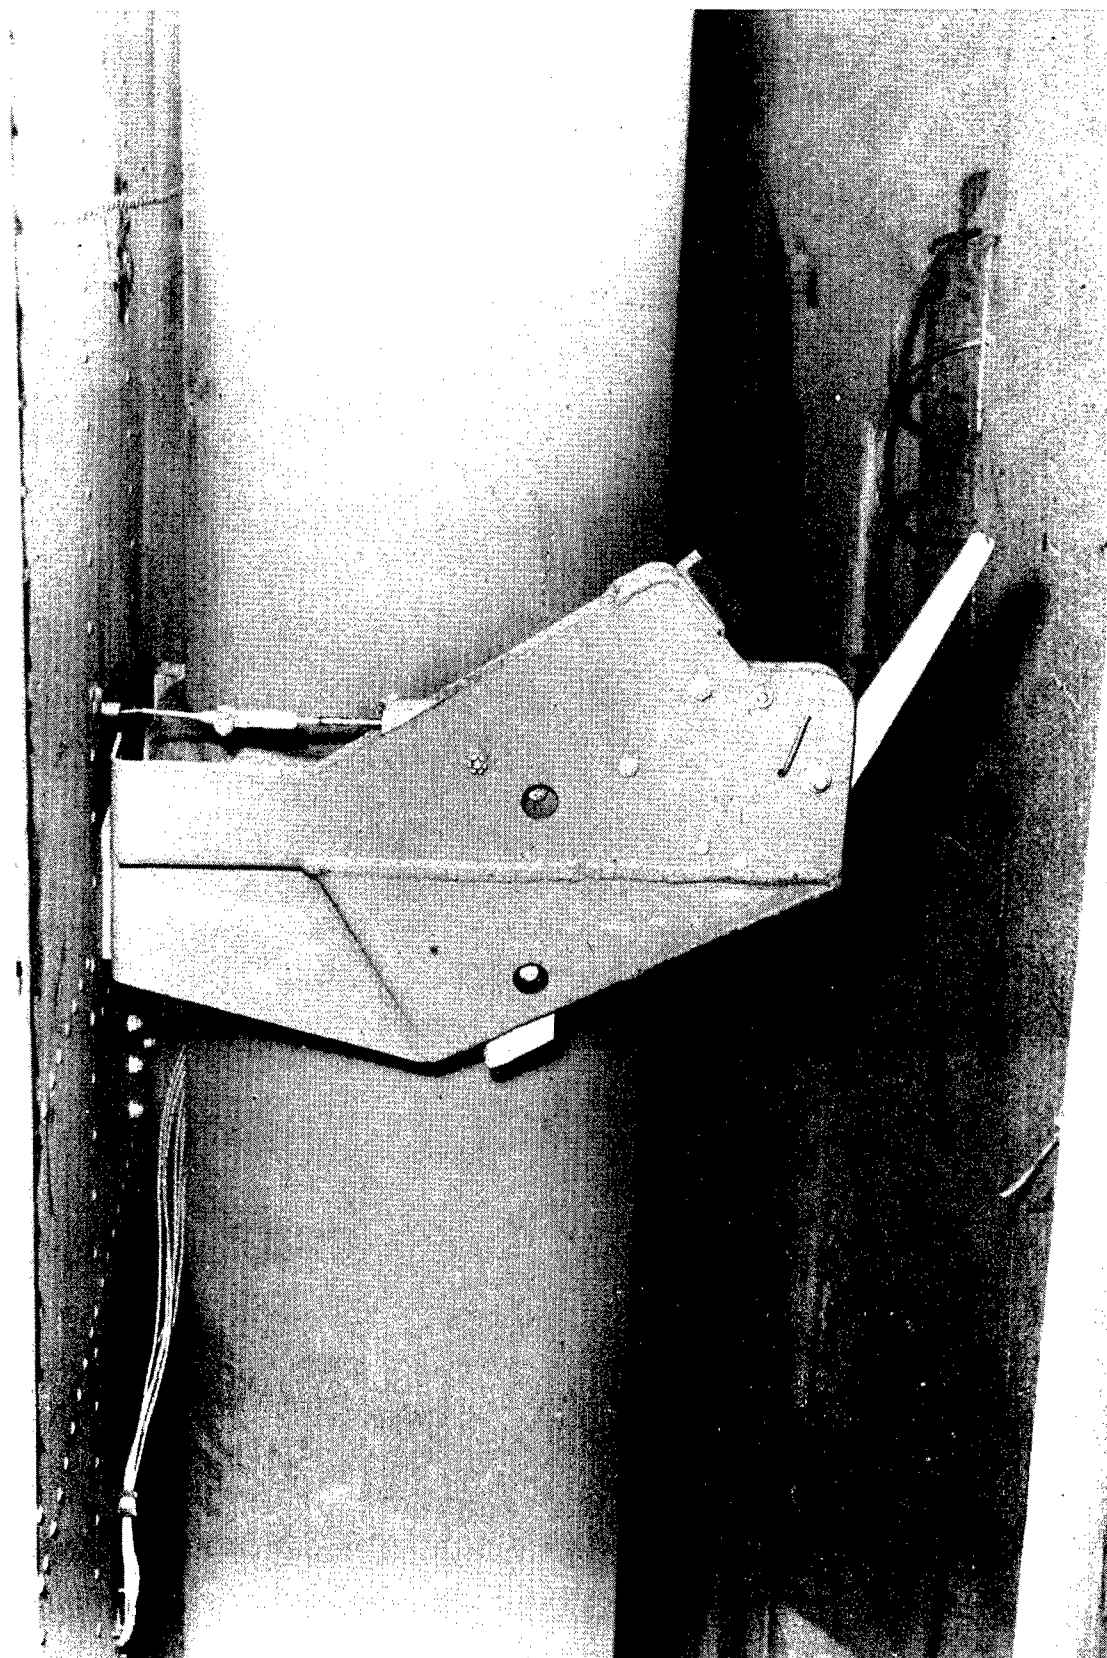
CATAPULT TRIGGER ASSEMBLY INSTALLATION ON CARRIAGE.
